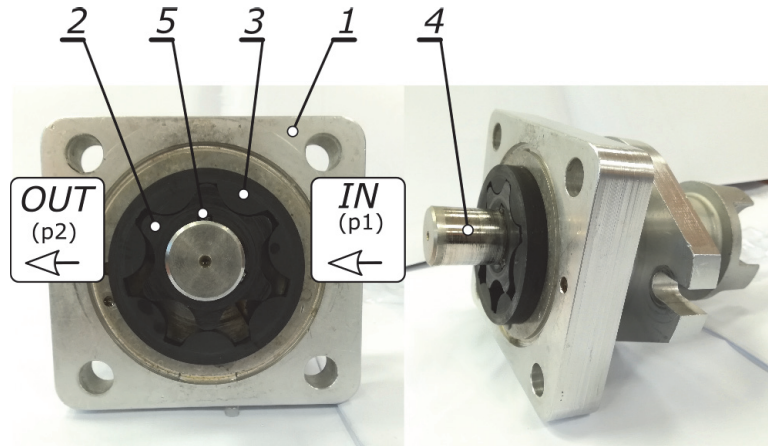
Tested gear pump. (a) view of the pump with an exemplary set of gears mounted, (b) view of the front part of the body; 1 – front cover, 2 – external toothed gear, 3 – internal toothed gear, 4 – input shaft, 5 – keys.
